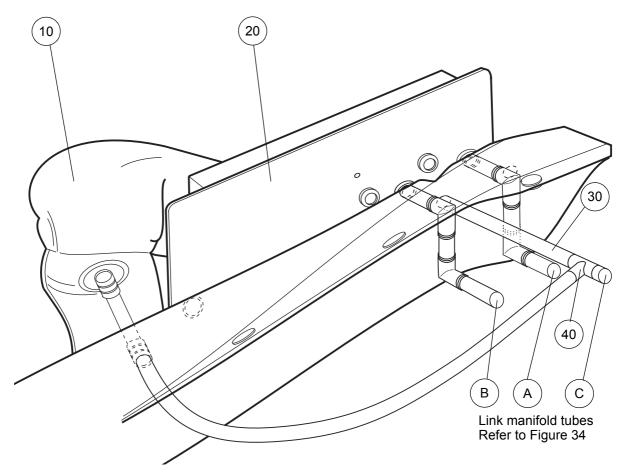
CPR and Heel Protector Connections to the Link Manifold assemblies
